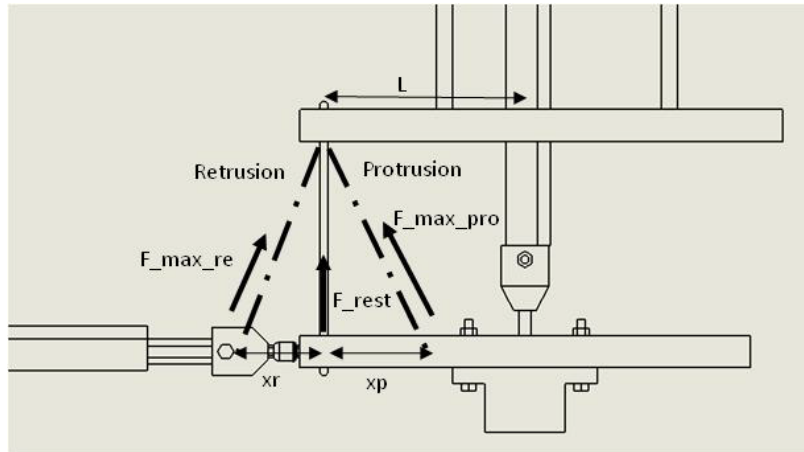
Side view of select assembly parts shows pro- and retrusion will cause elastic to elongate, producing a tensile force on the system
